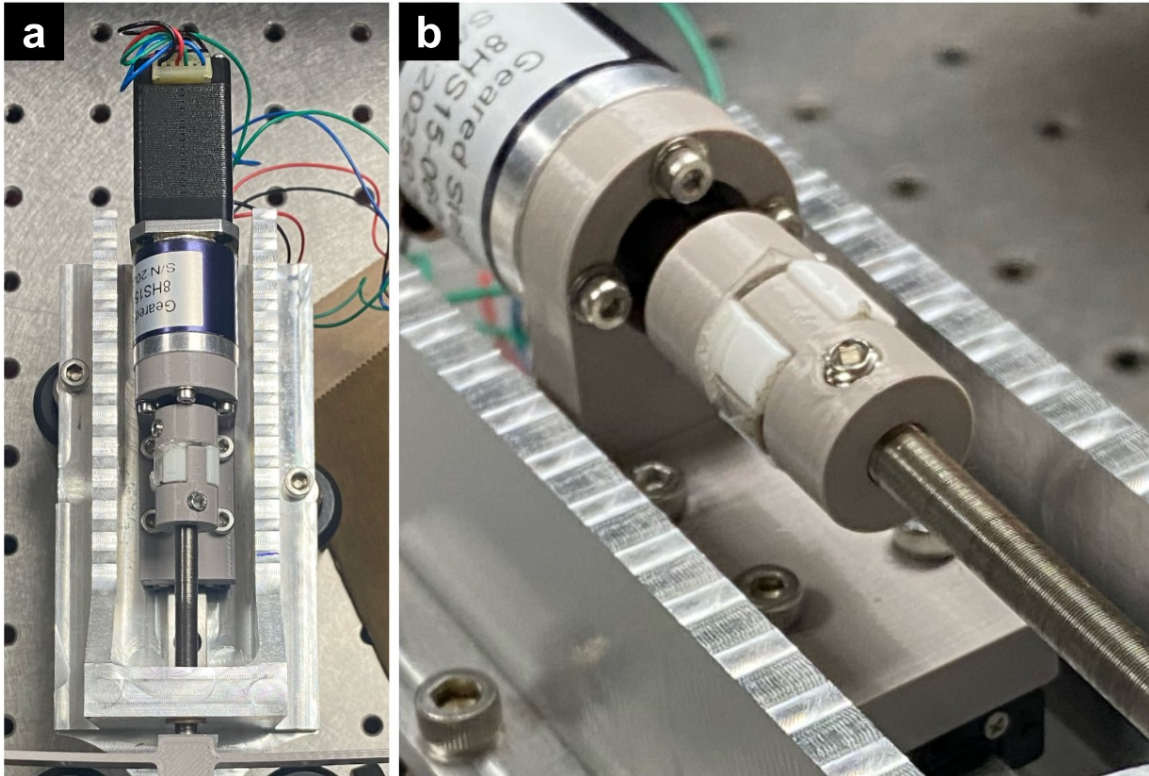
Shaft coupler. (a) Top-down view of the shaft coupler assembly and (b) zoomed-in view of the shaft coupler.
